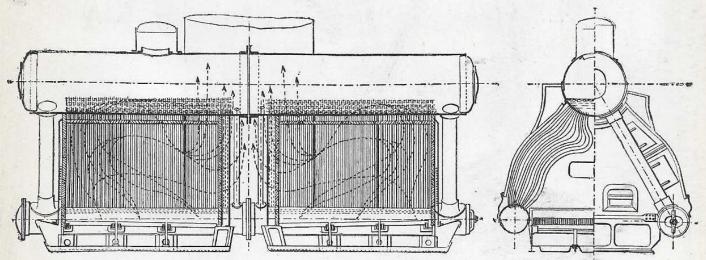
WATER TUBE BOILER, with small Tubes (Messrs Normand & Co., Havre).
